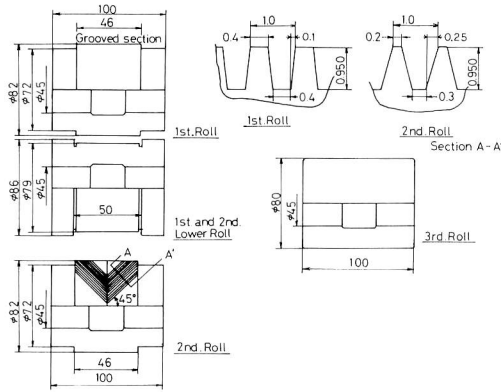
Dimensions of the rolls installed in the 3-stand tandem mill ( Ref. Fig. 9 )
